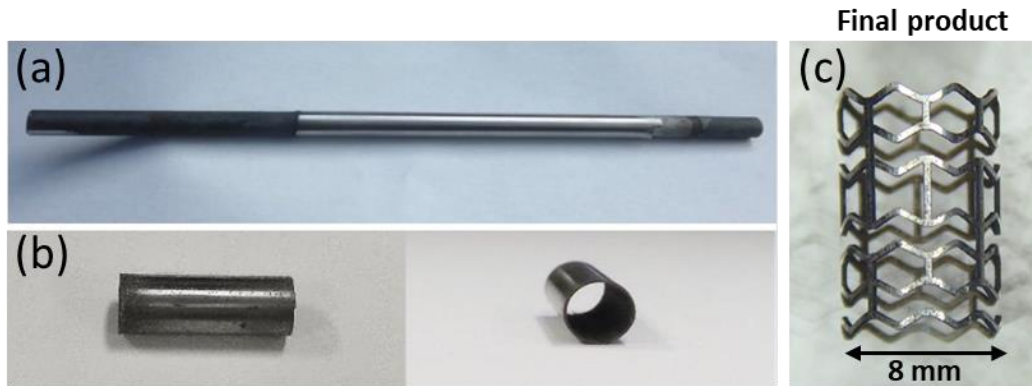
The fabricated 316L/Fe composite metallic stent after each post-processing step of (a) grinding, (b) electric discharge machining (EDM) to remove substrates, (c) femto laser cutting. (reproduced from Ref. [2.107] with permissions)
